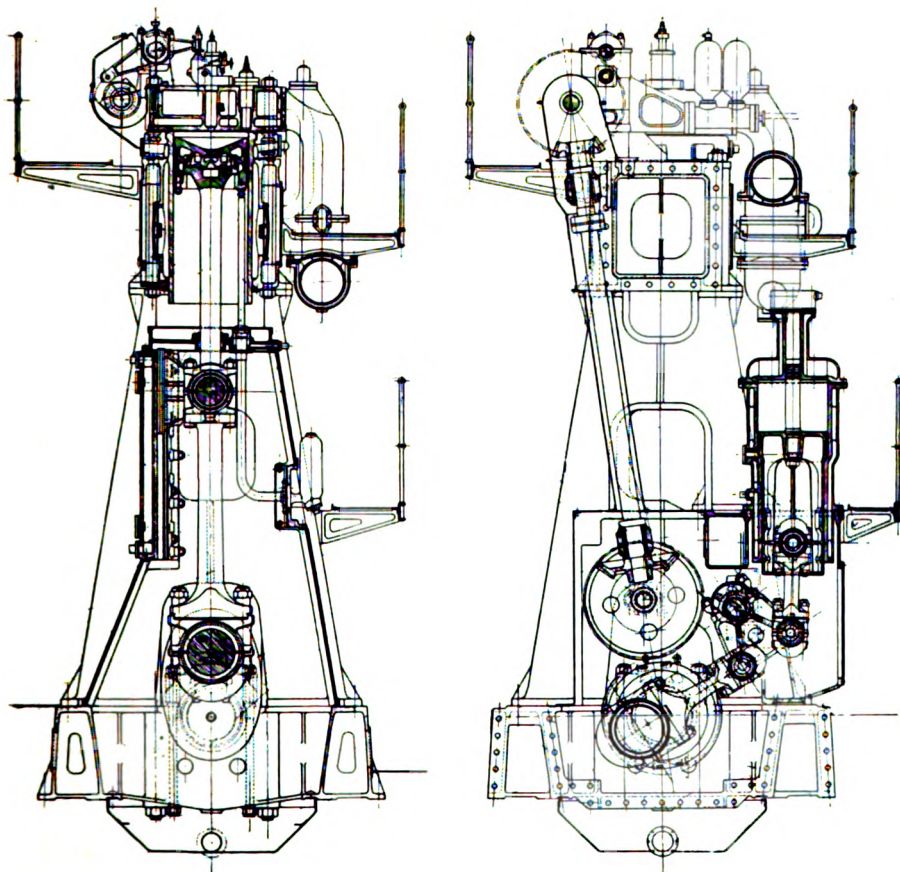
CROSS SECTION THROUGH CYLINDER AND COMPRESSOR OF 4-CYCLE, SINGLE ACTING M. A. N. DIESEL ENGINE
